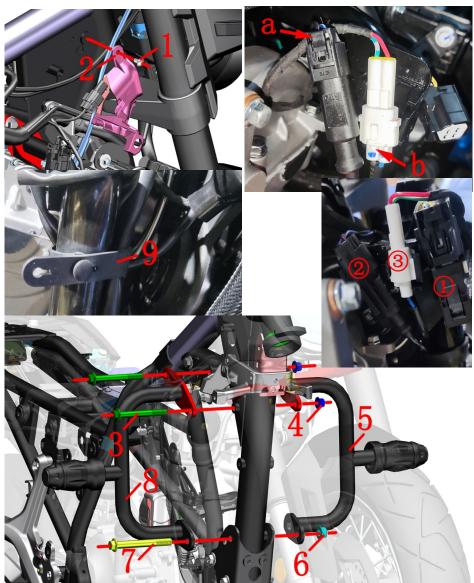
1 GU	JARD BAR	Guard bar component 1	CHK	40)
